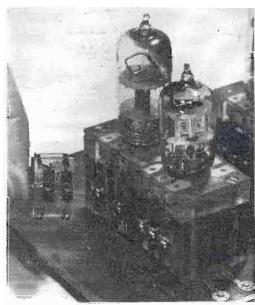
Closeup shows details of "cellular" technique being investigated for Navy to make equipment more compact, reliable, simpler
